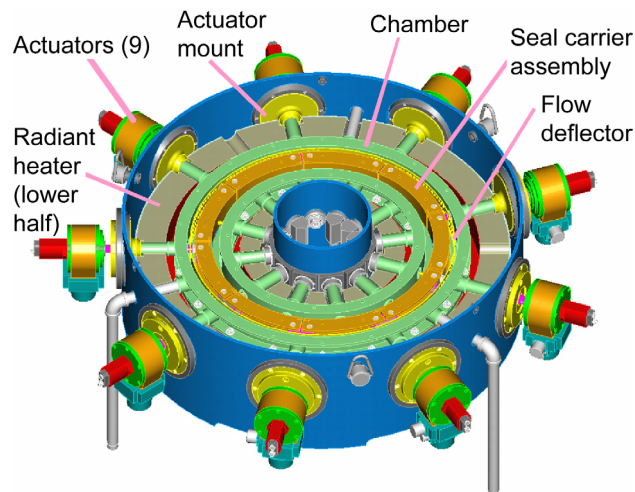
ACC test rig with housing lid and chamber cover plate removed for clarity.
